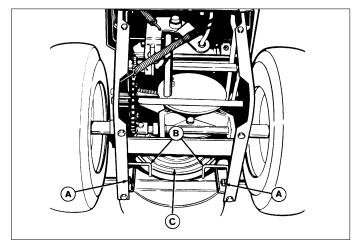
Auger Pulley Belt Stops (shown with bottom cover removed)
